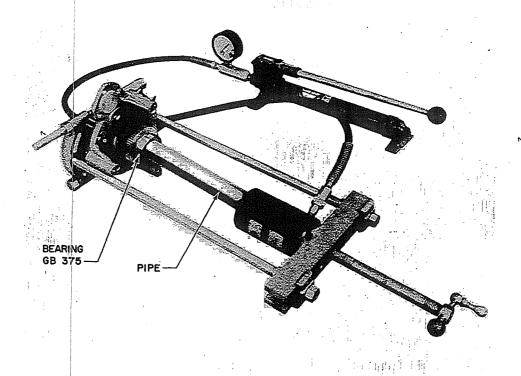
1 to 1 Shaft, Installation of Bearing GB375
